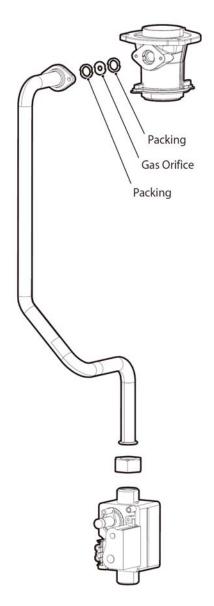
Exploded View of Gas Pipe Assembly (NCB-24/28/34LSWE)
